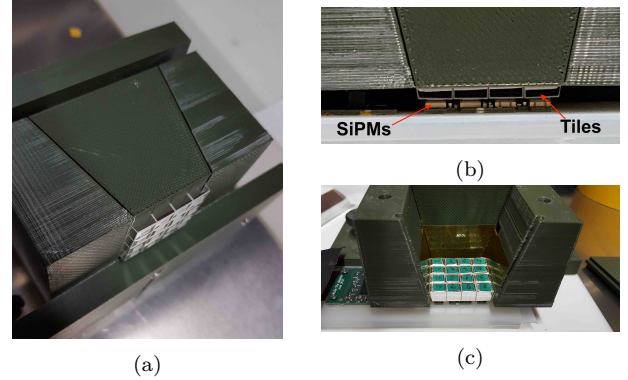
Gluing tool design to glue a 16 channel matrix on one side of tile matrix board: (a) the tools with 16 tiles pressed before gluing, (b) tiles pressed on SiPMs during the gluing stage, (c) glued tile matrix after curing.
